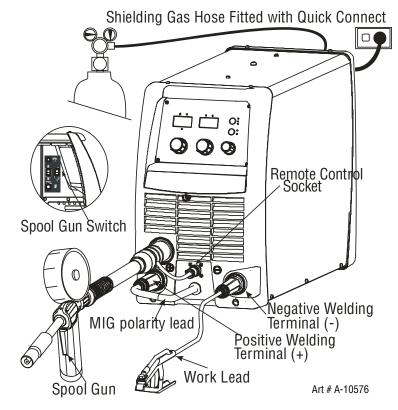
Setup for Spool Gun Welding with Gas Shielded MIG Wire
